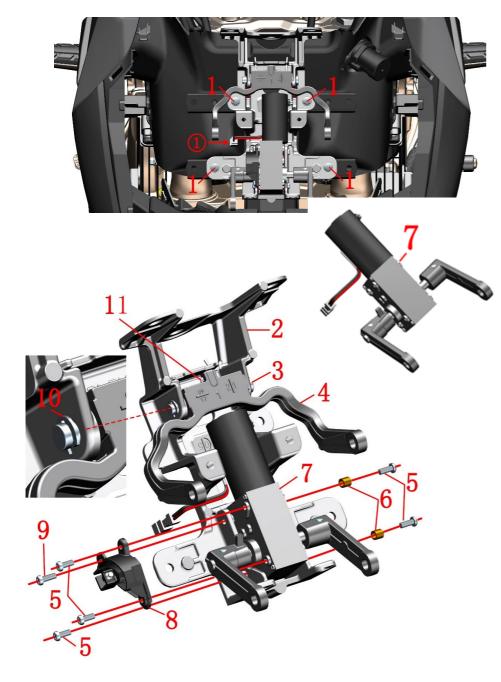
F	RONT FORK	Windshield base assembly	CHK
